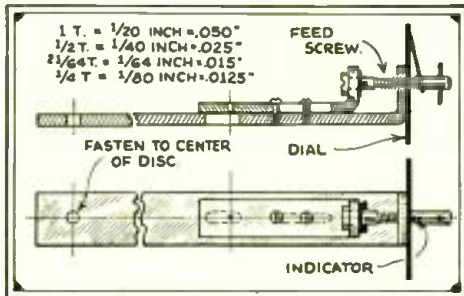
Simple hole layout jig; by turning the 20 pitch screw the required fractional part of a turn, and moving the jig arm 6 degrees each time, any hole layout can be made. Drill disc on vertical milling machine for high accuracy, with disc solidly backed.
